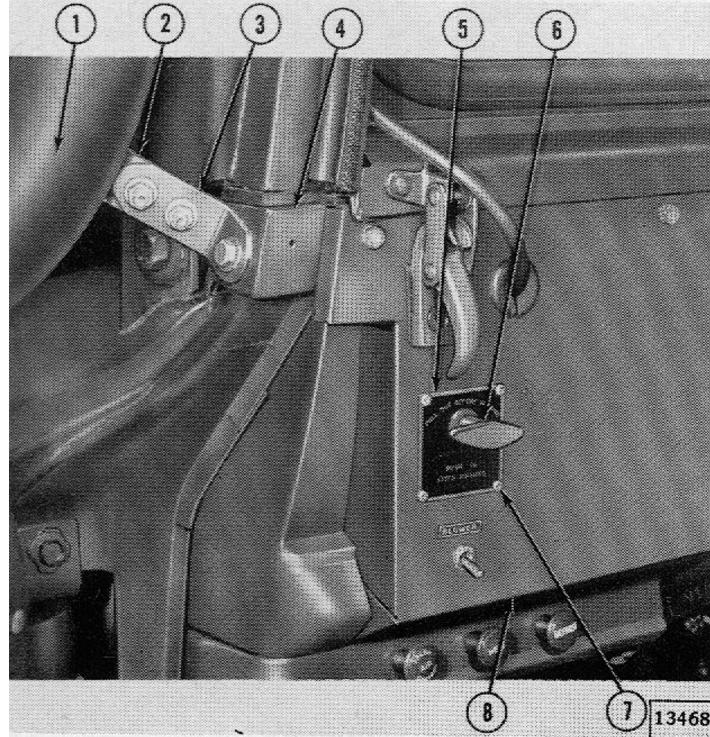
B7 FORDING VALVES CONTROL KNOB AND INSTRUCTION PLATE
